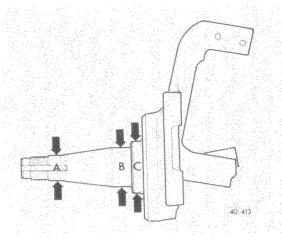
Wheel bearing/grease seal seats, checking for wear
